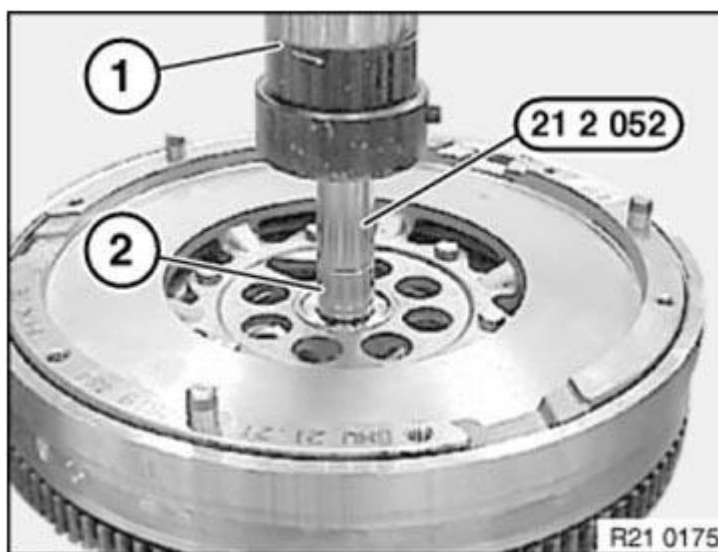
Pressing Roller Bearing Into Dual-Mass Flywheel
